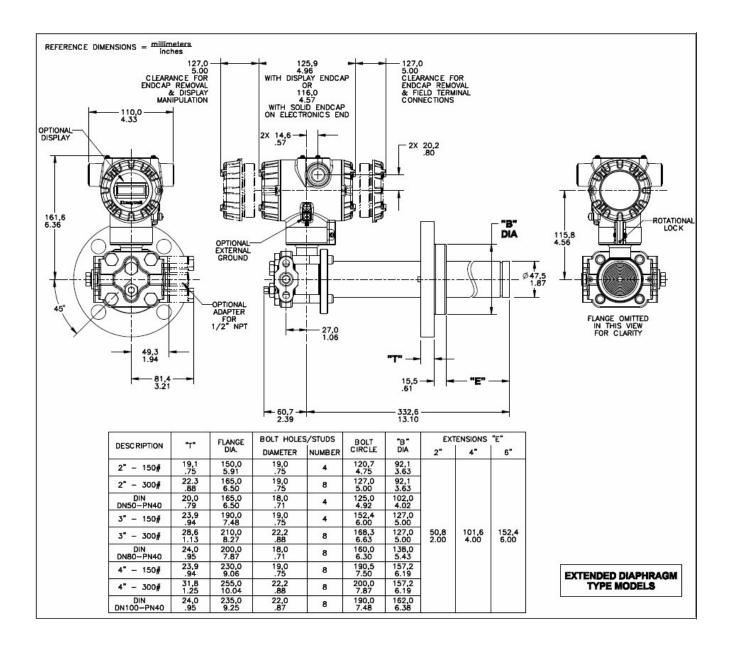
Typical mounting dimensions for extended diaphragm type models STF828 and STF832.
